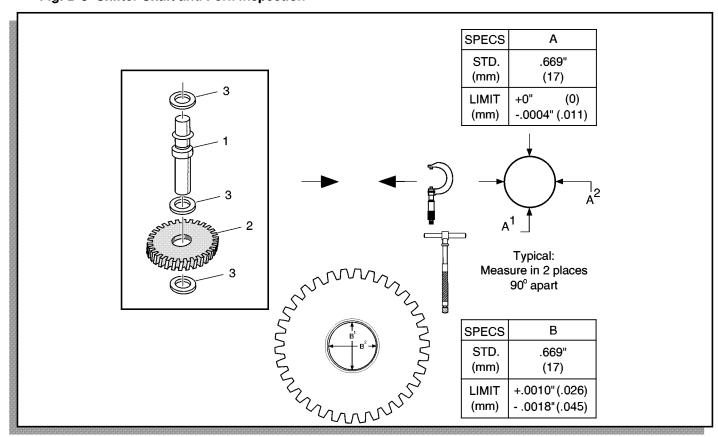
Counter Shaft and Reverse Idler Gear Inspection
